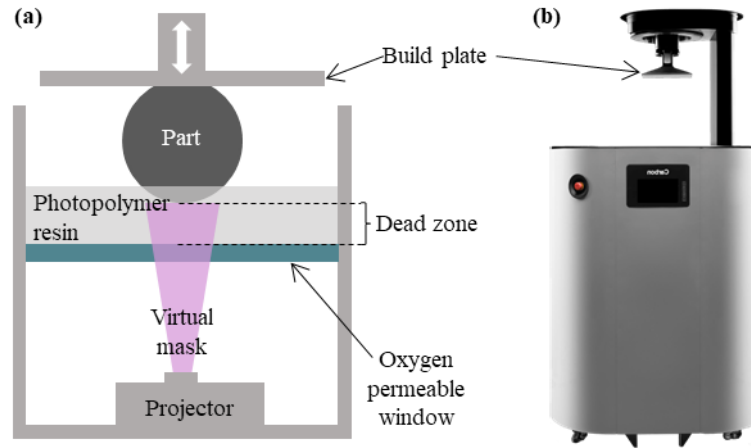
(a) Schematic illustration of CLIP technology, illustrating the dead zone between the oxygen permeable window and the build plate and, (b) an example of CLIP 3D printer (Carbon 3D Corp., CA, USA). Image source (b): <https://www.carbon3d.com/products/m1-3d-printer>.
